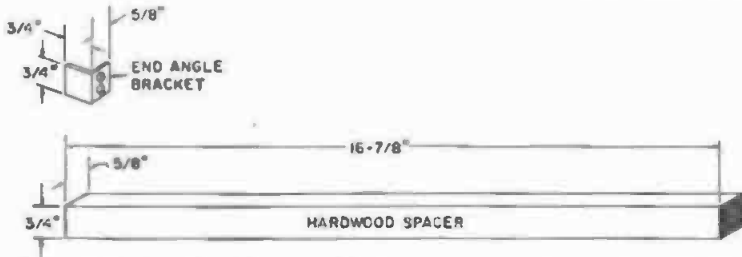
Hardwood spacer for jack strips, and mounting bracket.
